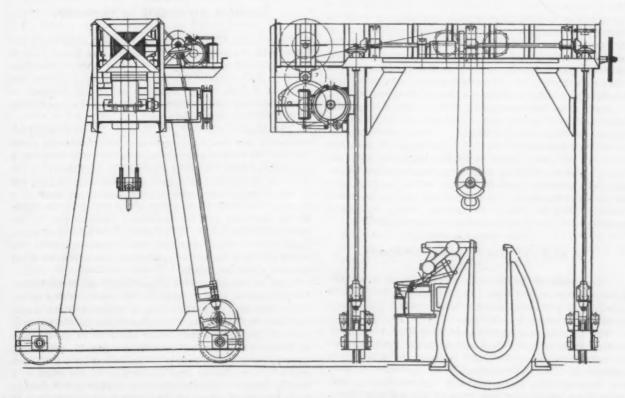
Automatic Riveting Gantry Used in Connection with a Stationary Riveter, Built by the Standard Bridge Tool Company.
